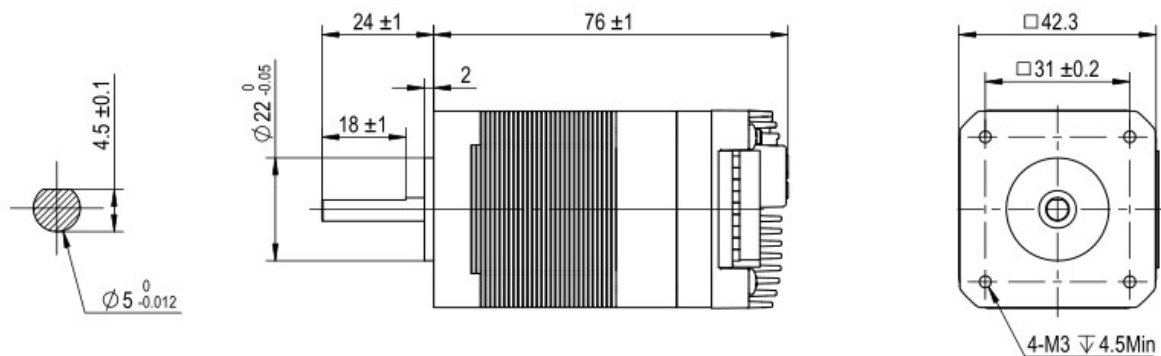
HO/N/Sn3 motor mounting dimensions (mm).
